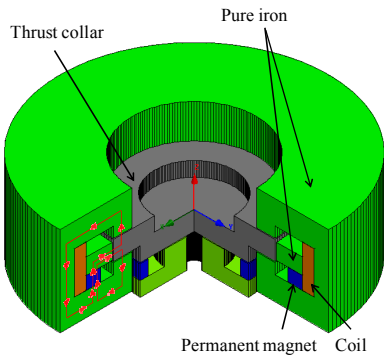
Configuration and magnetic flux path of thrust bearing using radially magnetized magnet
